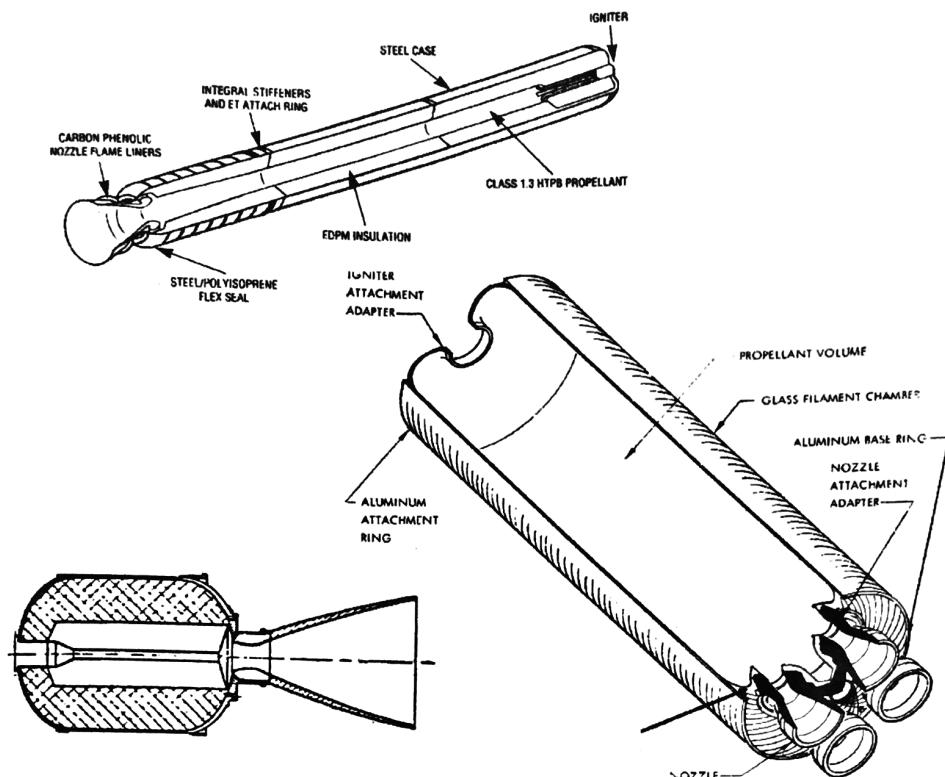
Design Examples of Single-case and Segmented Motors
